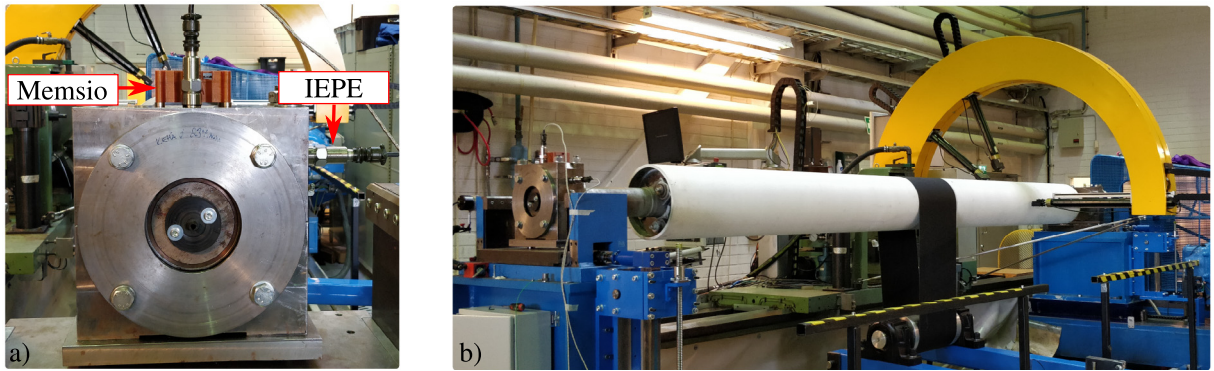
The roll test setup. a) Memsio and IEPE accelerometer on the tending side of the bearing housing. b) The paper machine roll mounted to a CNC grinding machine. The sensors are on the left-hand side bearing housing.
